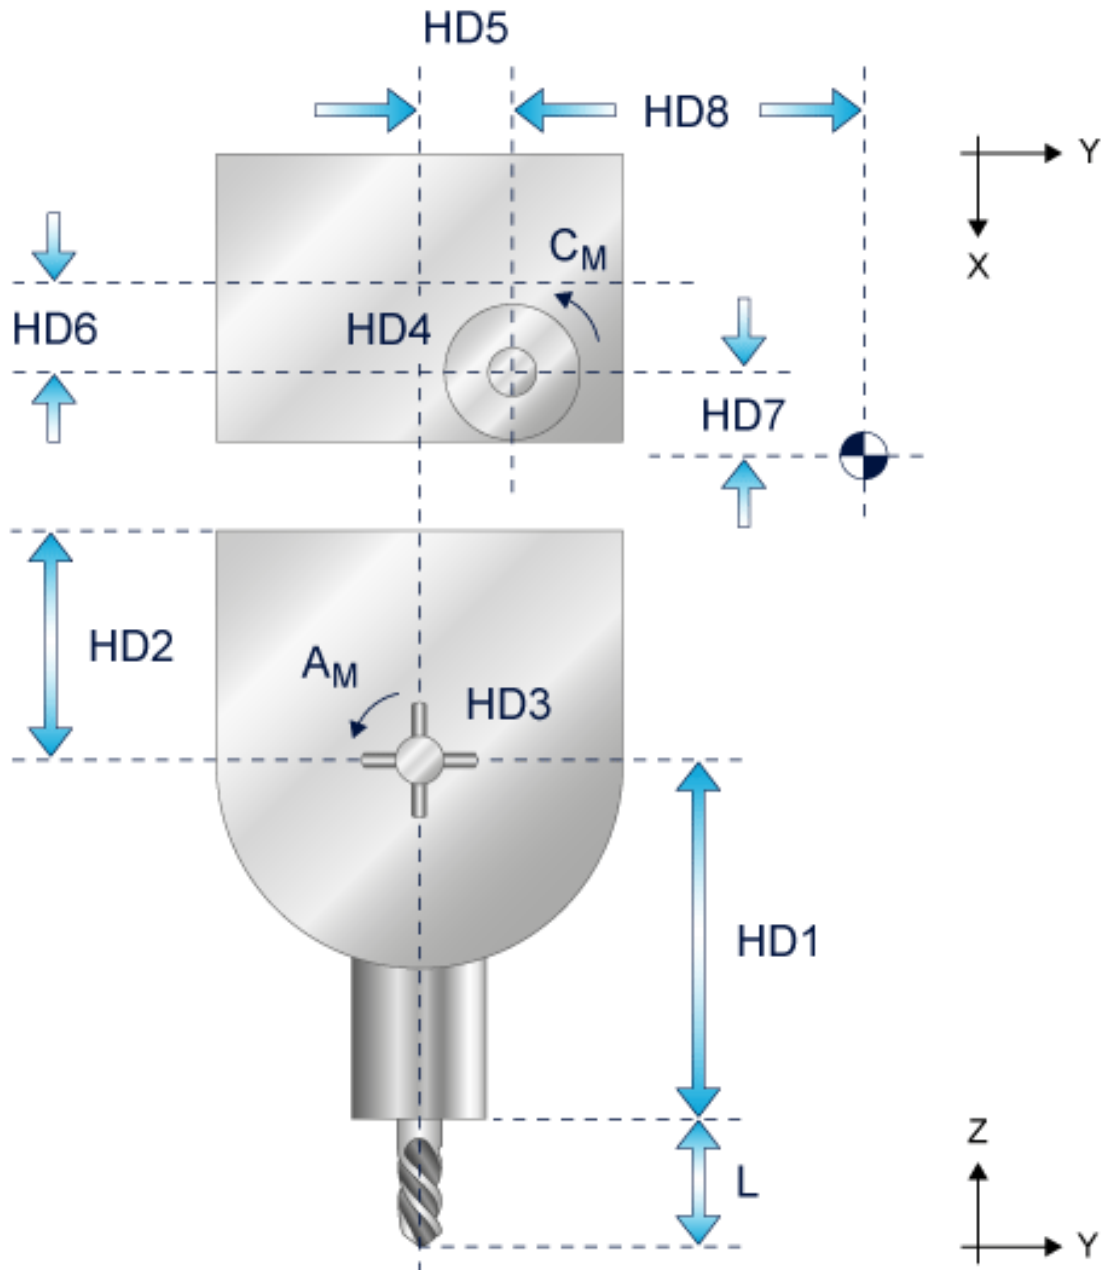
Boring and milling tool (zero position where $HD3 = 0$, $HD4 = 0$)
